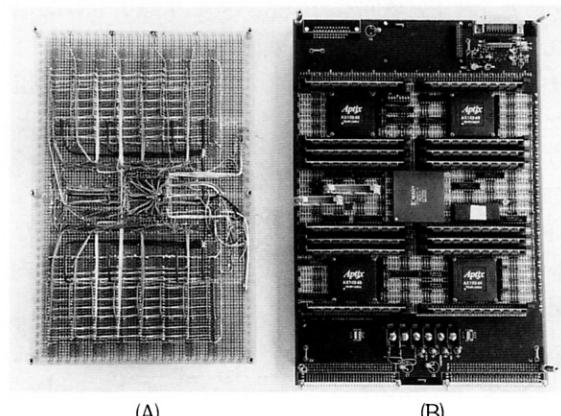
Wire-Wrapped board (A) & FPCB (B)
